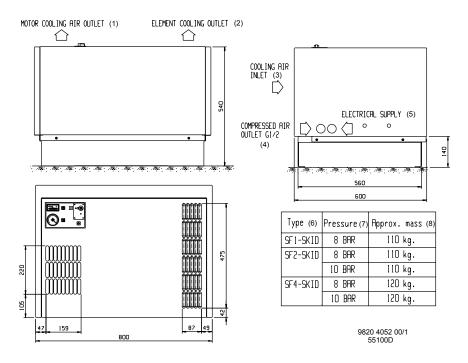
Dimension drawing, SF 1-4 Skid
